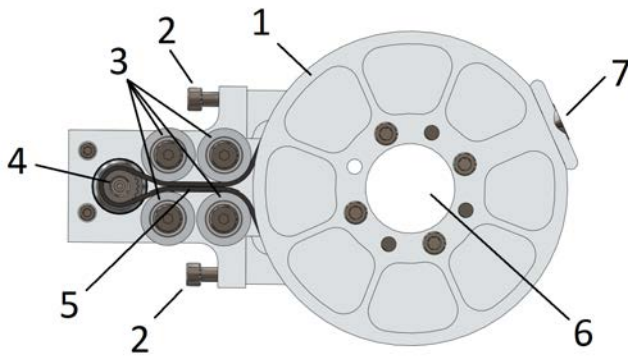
Overview of components for the pulley and belt tensioning system used in the base actuator (1) Output pulley, directly mounted to this is the 3-bit encoder shown in Figure 20 (2) Machine screw, used to increase or decrease tension in the drive belt (3) Idle pulleys, used to maximize belt wrap around the output and drive pulleys (4) Drive Pulley, directly driven from the IG-32, right angle gear motor shown in Figure 19 (5) Drive belt, a 3/8" wide MXL (0.080" pitch) timing belt with kevlar tension members (6) hole in base actuator to allow wire (7) Belt clamp, this fixes the belt to the output pulley and impart torque from the drive pulley
